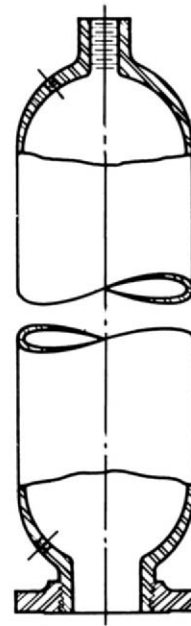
STRAIGHT THREADED CENTER OPENINGS IN INTEGRALLY FORGED HEADS WITH NOZZLE EXTENSIONS
